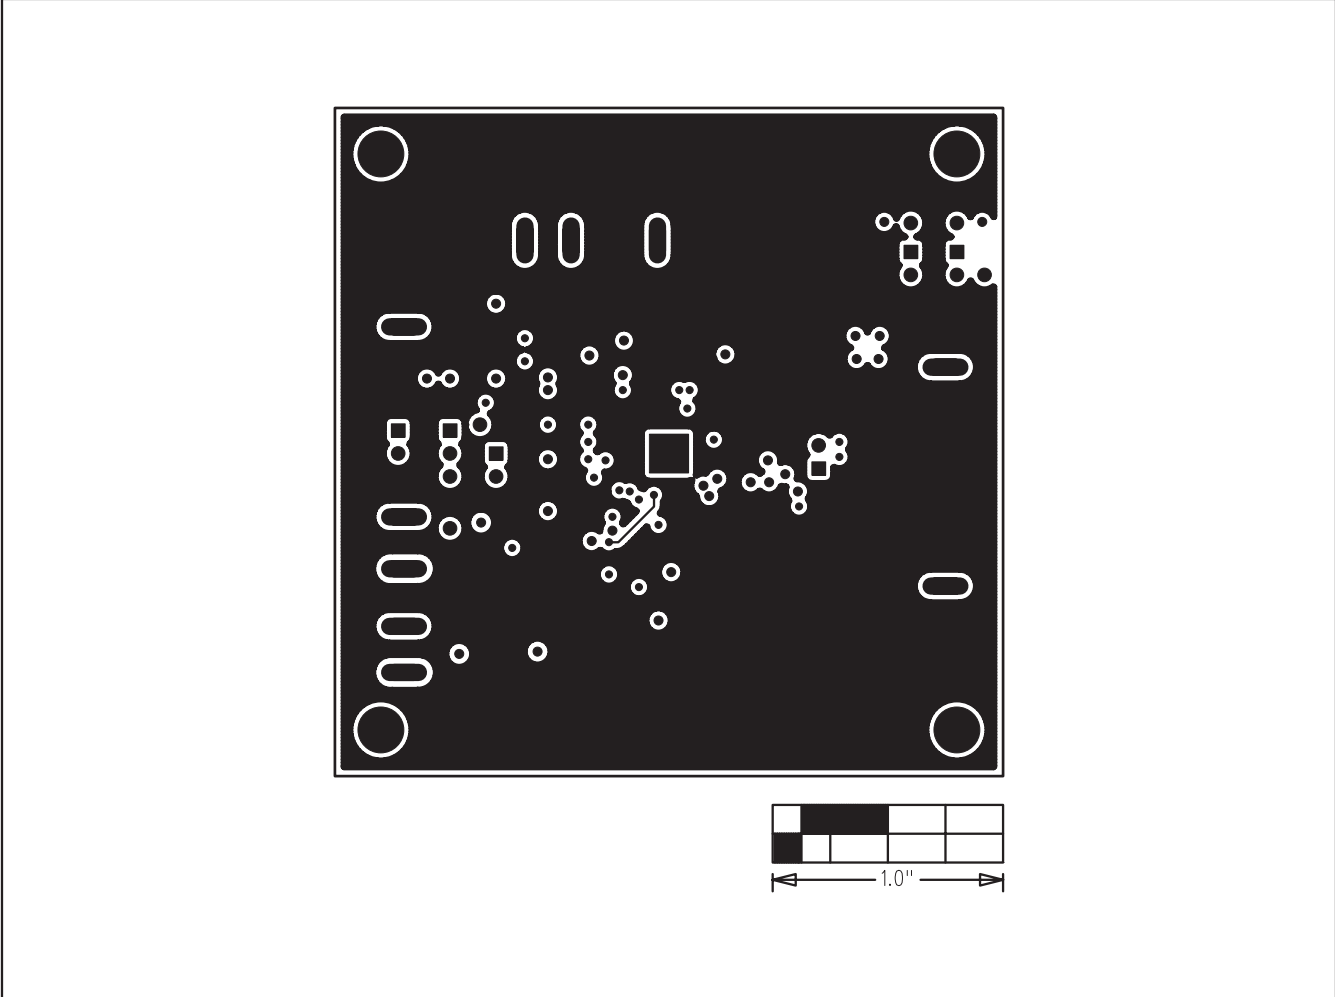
MAX17014 EV Kit PCB Layout—Internal Layer 2 (PGND Plane)
